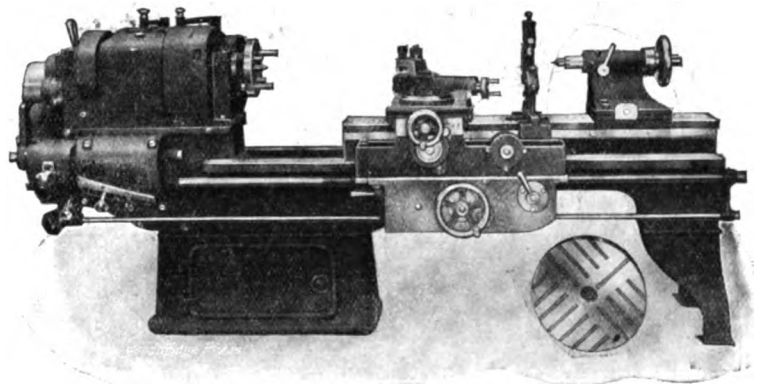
Drummond's 7½ in. High Speed S.S.S. Lathe.
